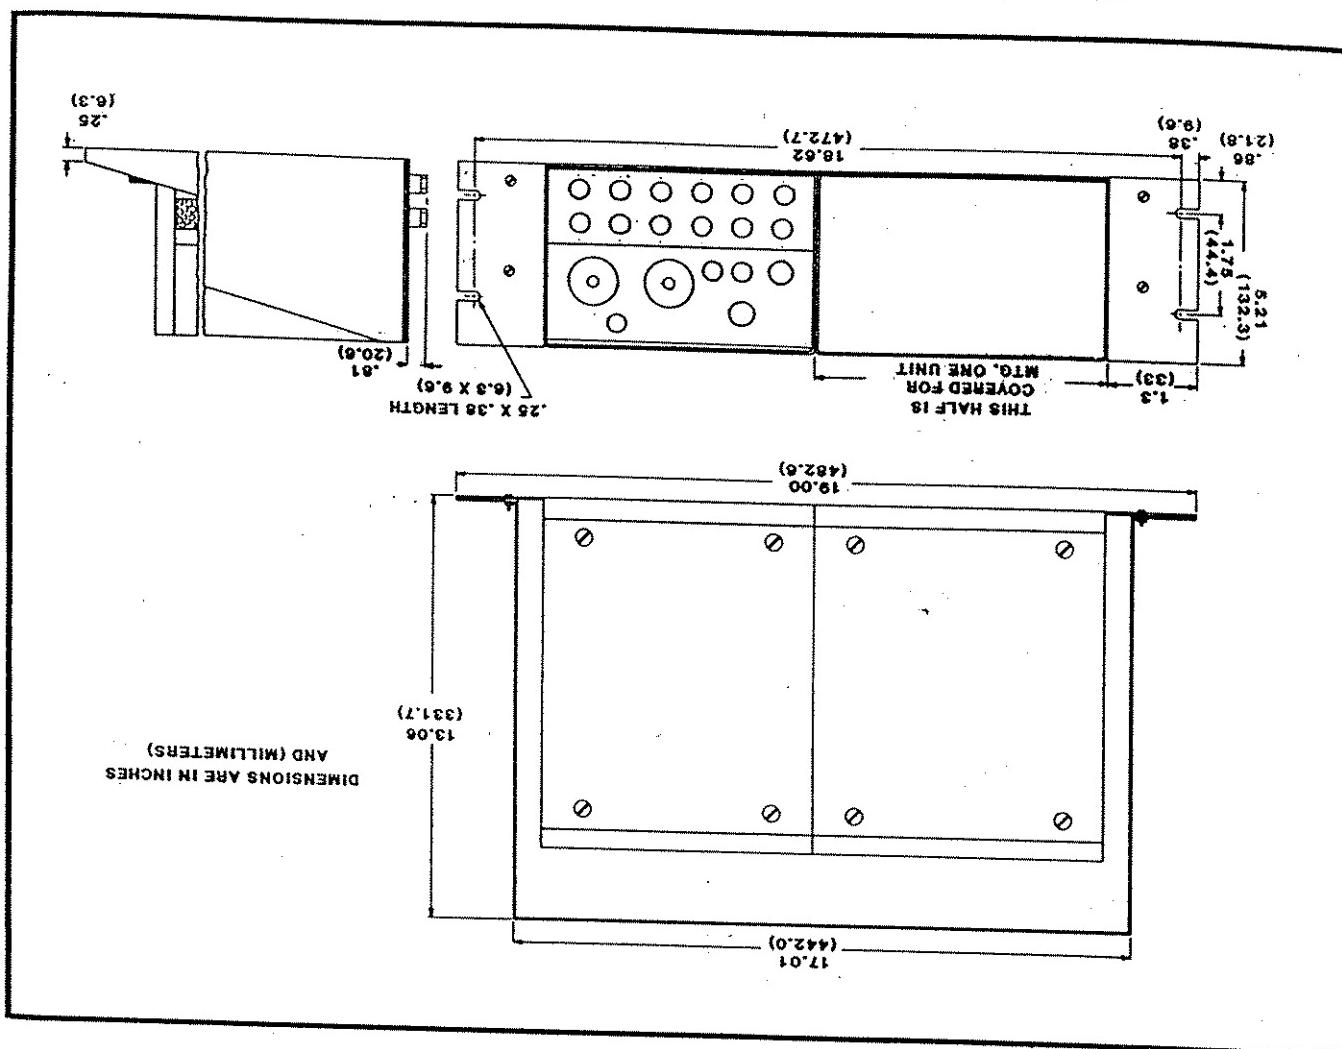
Model 1625A Outline Dimensions Rack Mount
